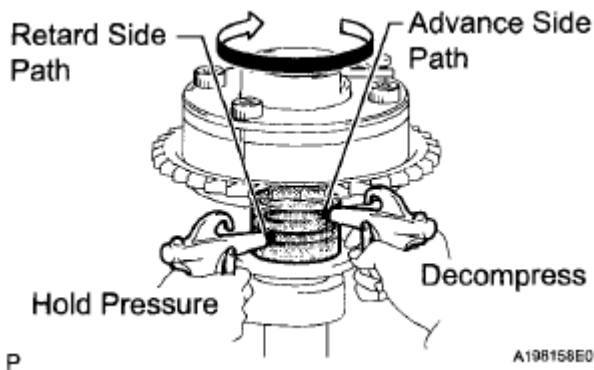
Checking Camshaft Timing Exhaust Gear Turns In Retard Direction
